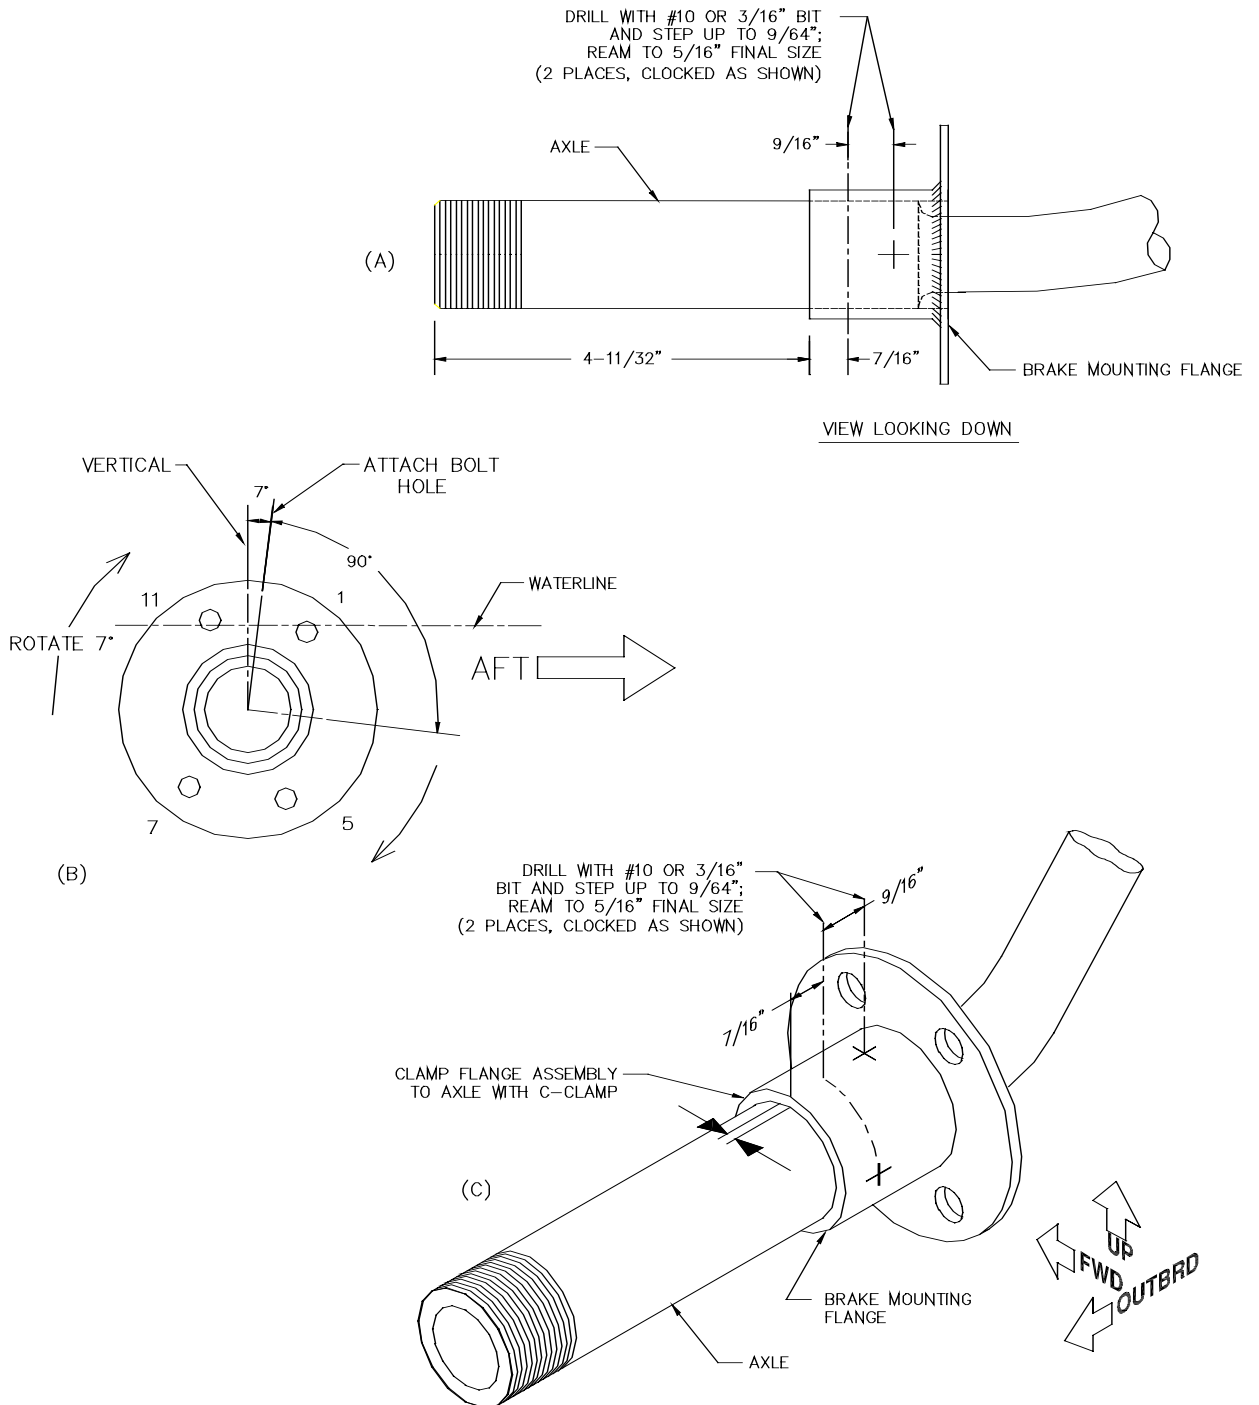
Drilling the Brake Mounting Flange/Axle Bolt Holes
